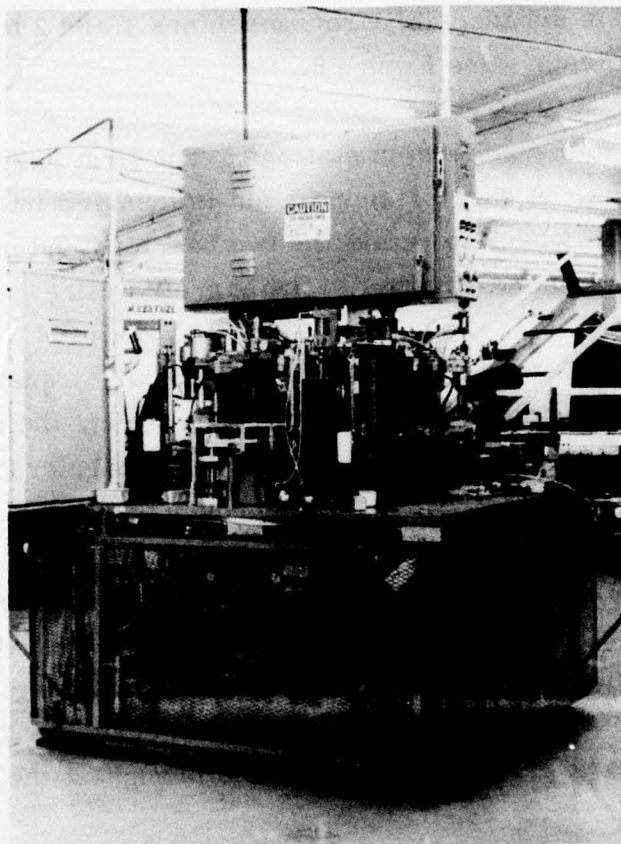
Machine No. 3 - S&A Mechanism Arm Check
